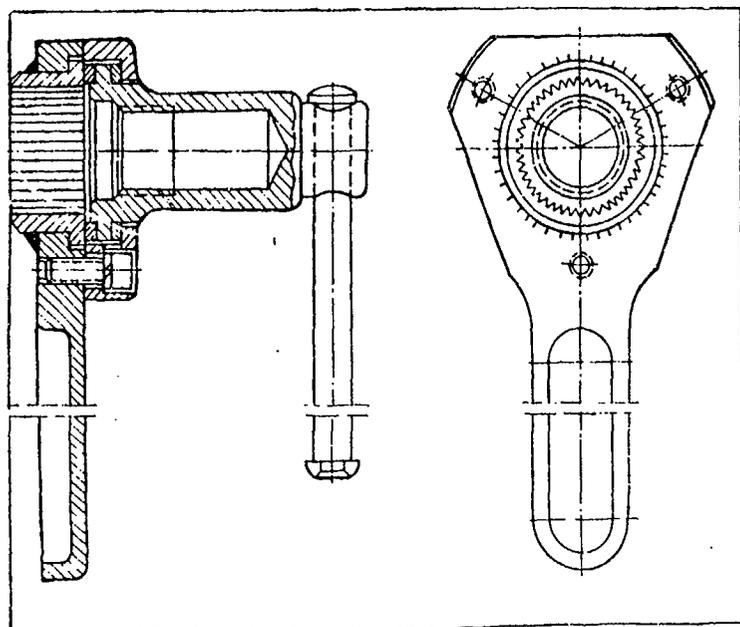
A lever-type wrench for turning the Pitman arm shaft during the adjustment and assembly of the steering mechanism
